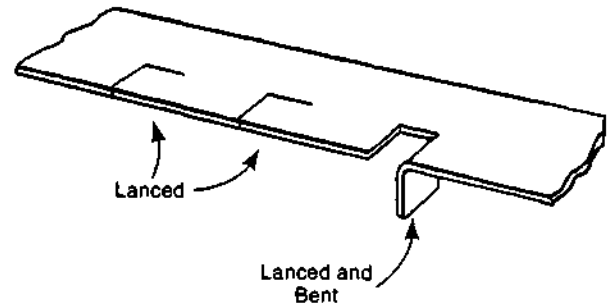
C8 A workpiece with lancing cuts, and one bending operation.
